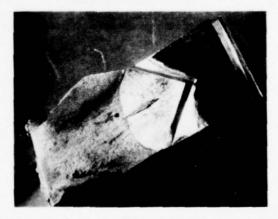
Fracture Surface of 7475-TMT2 Toughness Specimen 1324.
